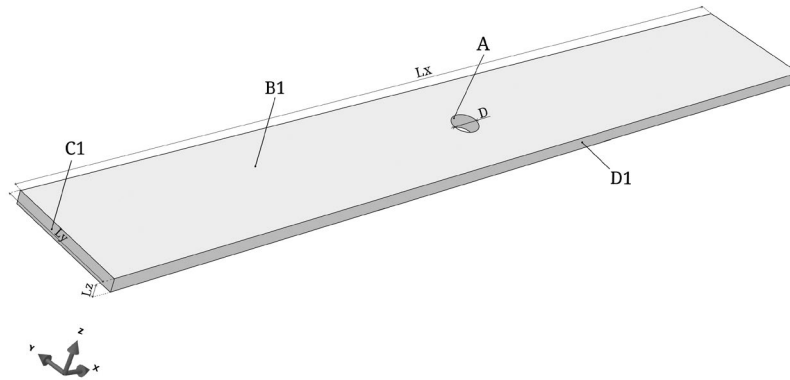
Identification of the specimen's surfaces and dimensions.
